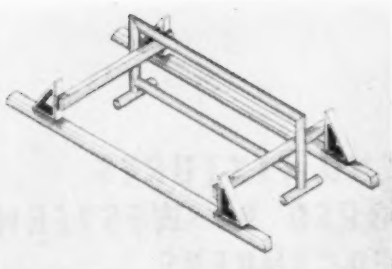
Schematic diagram of the "tooling ways." A rough picture-frame fixture is shown in line with the straight edges.
